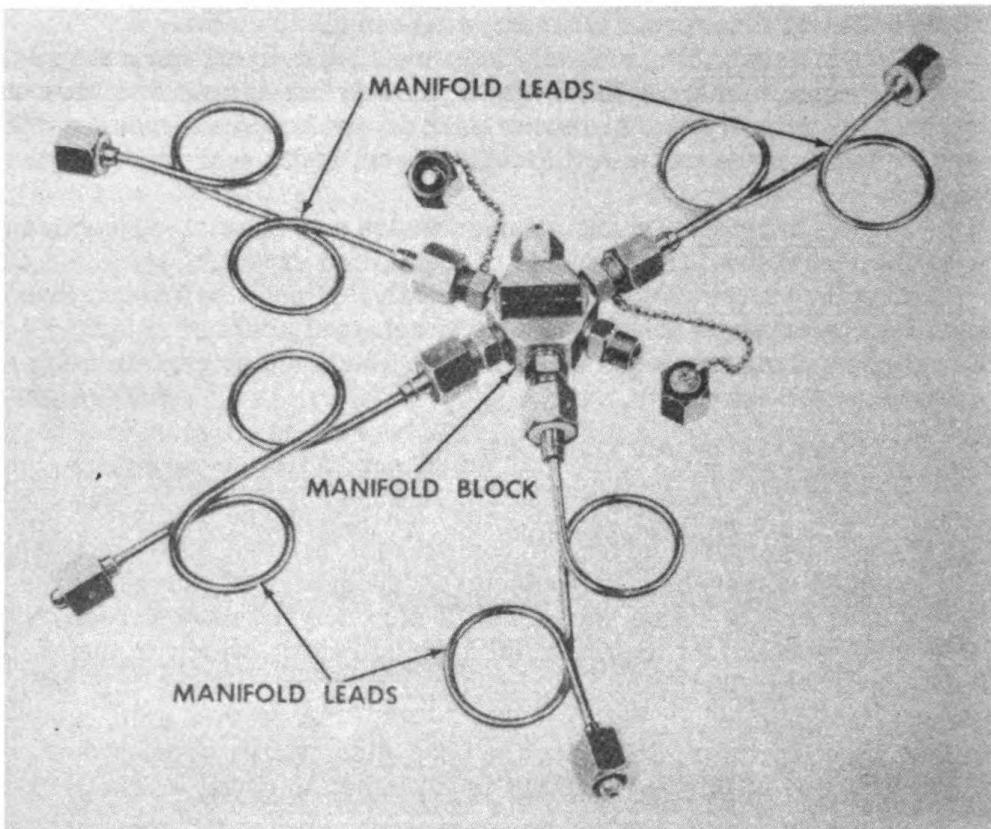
Pressure filling line assembly (manifold) from E9 service kit.
